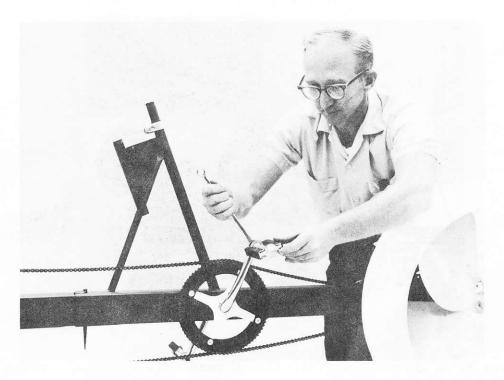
Install pedal marked "L" on left side by threading in counterclockwise direction, and pedal marked "R" on right side in clockwise direction. Tighten pedals with wrench.
